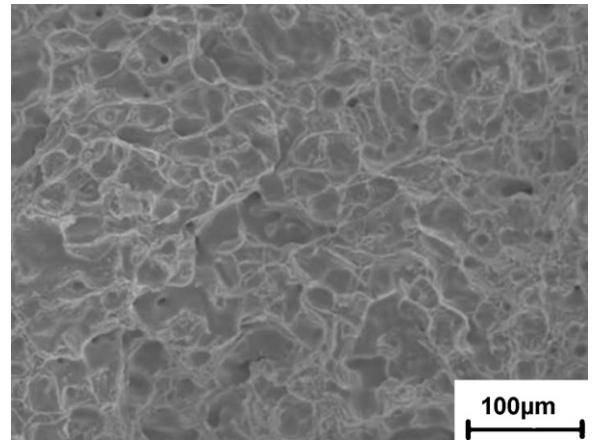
Fracture surface of a CP-Ti MIM-tensile test sample after mechanical test showing honeycomb structure which signifies a typical sign for a ductile break.
